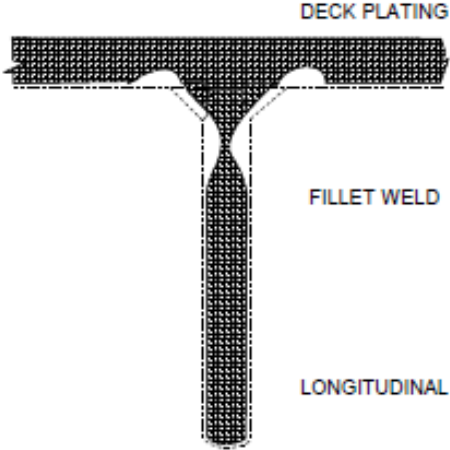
Grooving corrosion in weld seam between longitudinal and deck plating (DNV 2013a)
